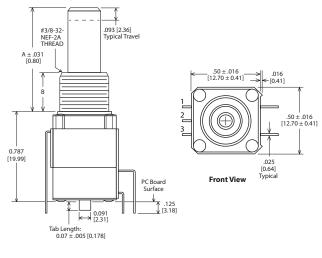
C10: C-10 Dual Potentiometer, Concentric Shaft, PC Pin Terminals, 3/8" Dia. Bushing
